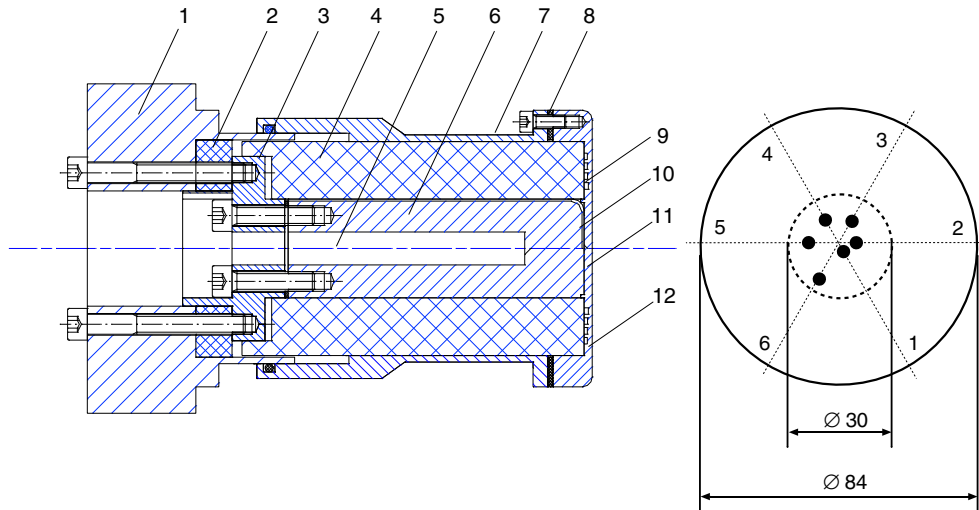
Heating element with vertical copper surface and arrangement of thermocouples soldered underneath: (1) mount, (2) PTFE bushing, (3) flange, (4) mineral wool insulation, (5) drilled hole for heating element, (6) copper core, (7) stainless steel cylinder, (8) PTFE gasket, (9) concentric grooves, (10) thermocouple, (11) heating surface, thermocouple distance from center: 3, 5, 7, 10, 12 and 14 mm, (12) non-heated fin area.
